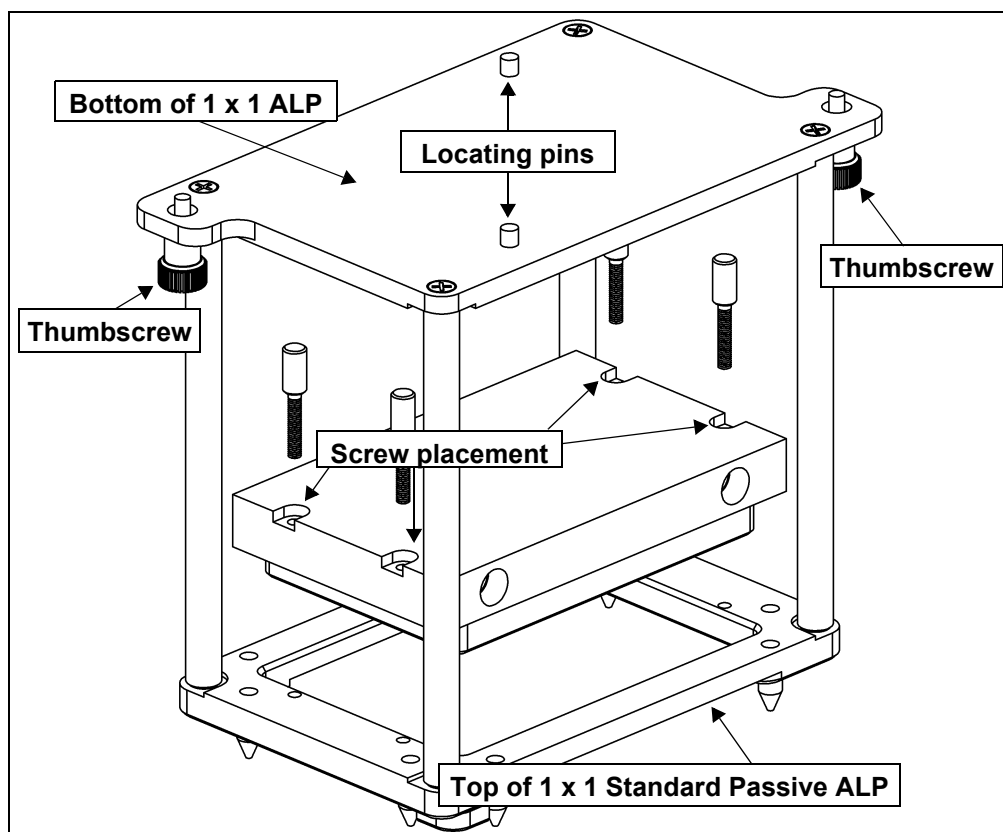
Heating and Cooling Unit mounting — bottom view
